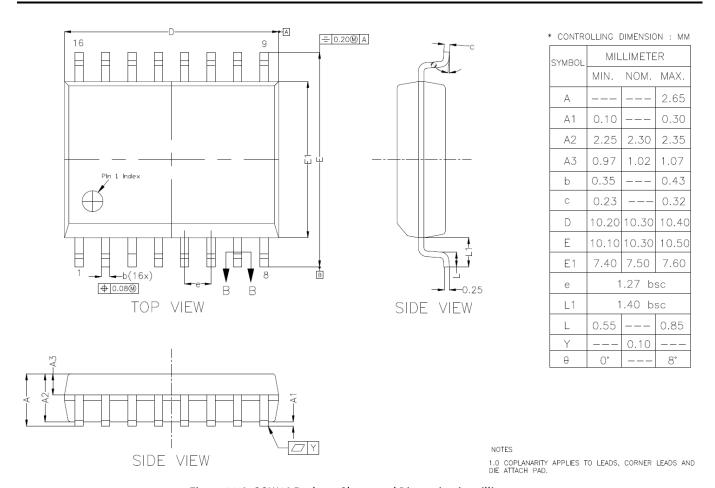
SOW16 Package Shape and Dimension in millimeters
